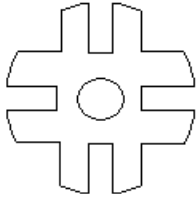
Hashtag shaped cuts made in the polymer cylinder. View from above.
